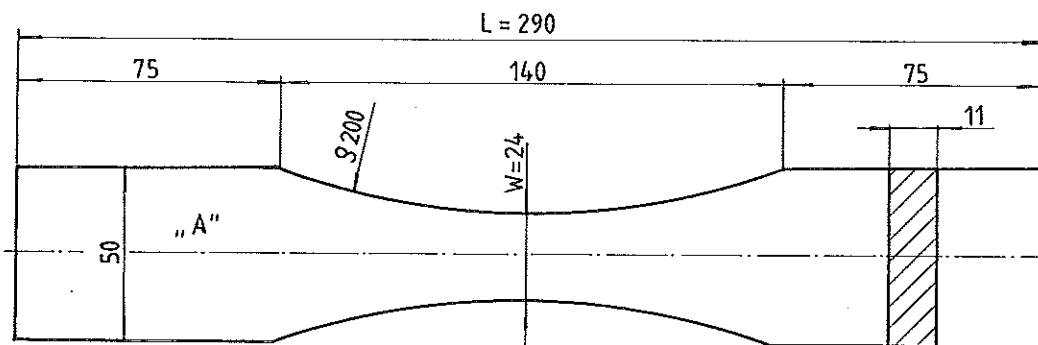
Tensile specimens, made of base metal and welded joint
